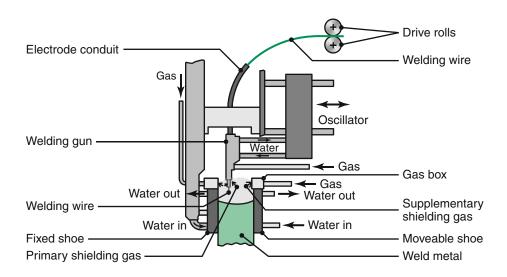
Schematic illustration of the electrogas-welding process.
